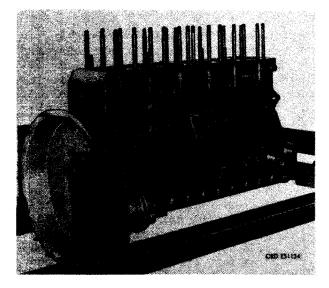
STRIPPED ENGINE BEFORE REMOVAL FROM ENGINE OVERHAUL STAND - 3/4 RIGHT REAR VIEW.
